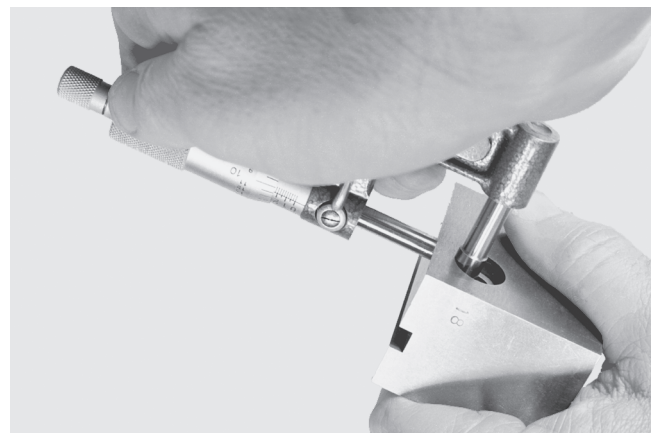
Tubing micrometer measuring hole-to-edge distance.
